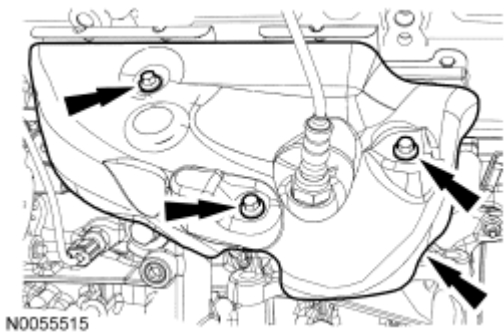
Locating LH Exhaust Manifold Heat Shield & Nuts
